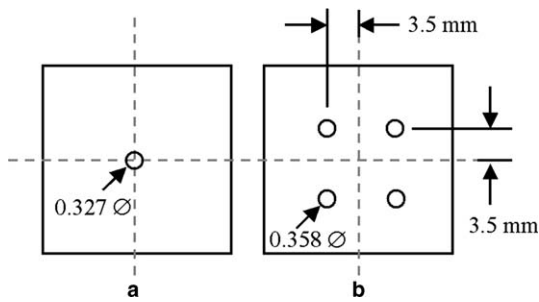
Size and location of the spray nozzles relative to the die for (a) the single-nozzle and (b) the multi-nozzle array. All dimensions in mm.
